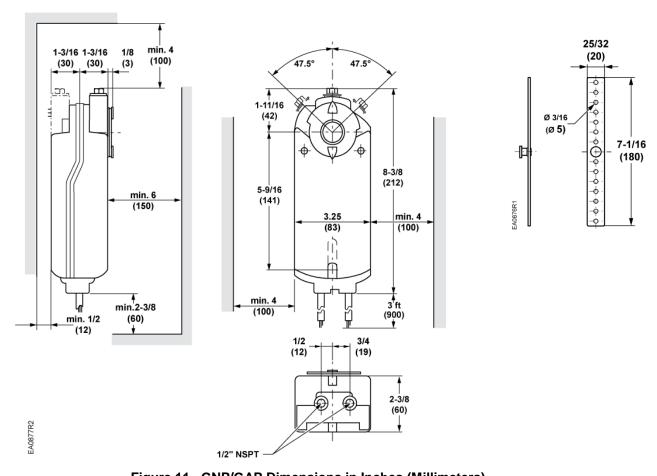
GNP/GAP Dimensions in Inches (Millimeters).
